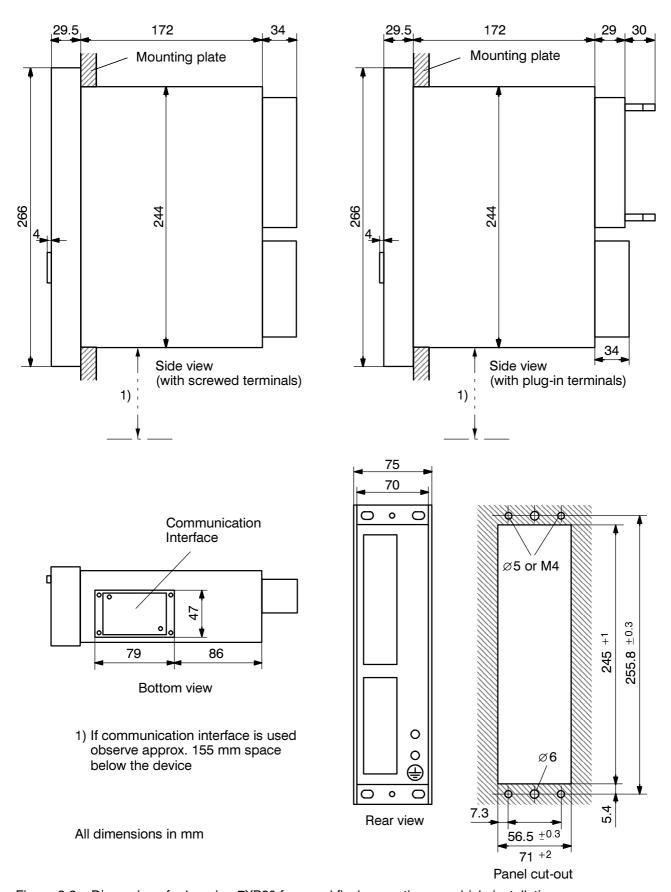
Dimensions for housing 7XP20 for panel flush mounting or cubicle installation
